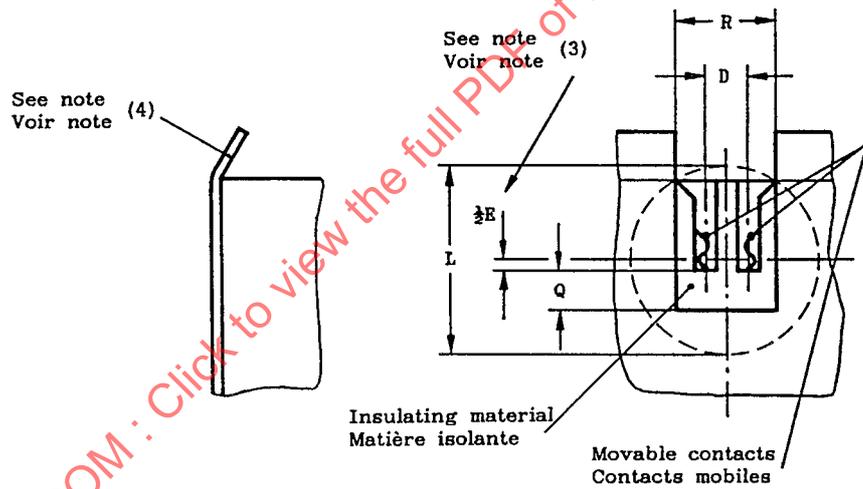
CONTACT ASSEMBLY WITH PARALLEL SLIDE-IN GROOVES
